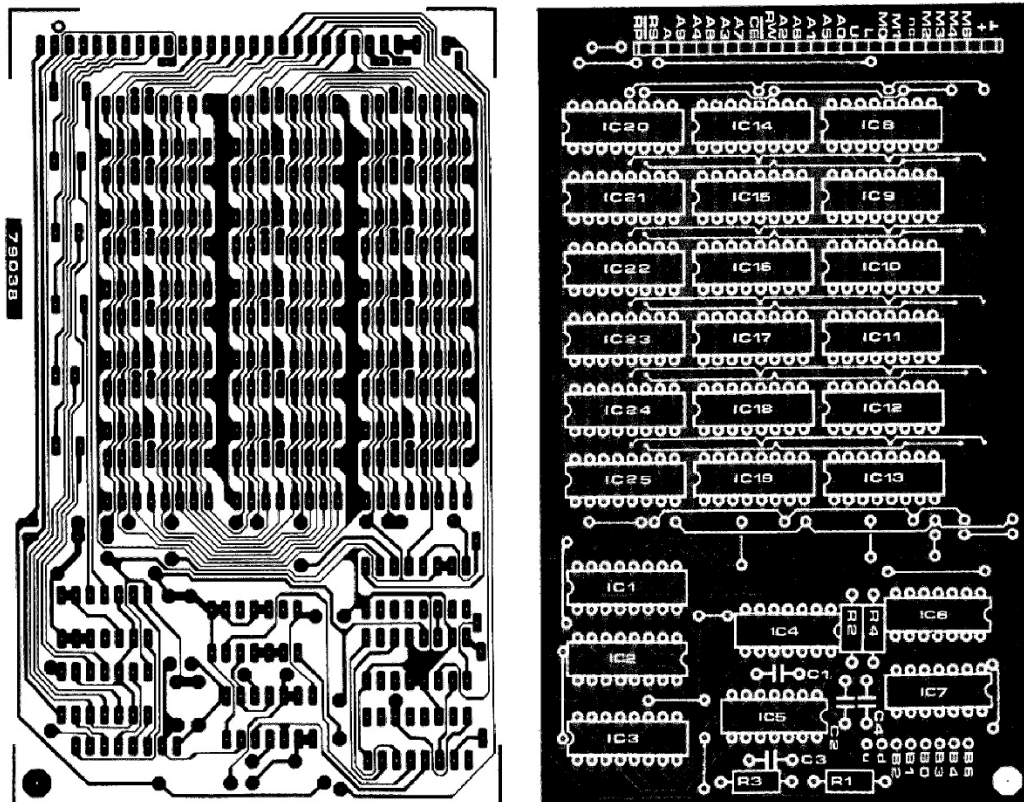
Track pattern and component layout of the printed circuit board for the extension of page memory.
